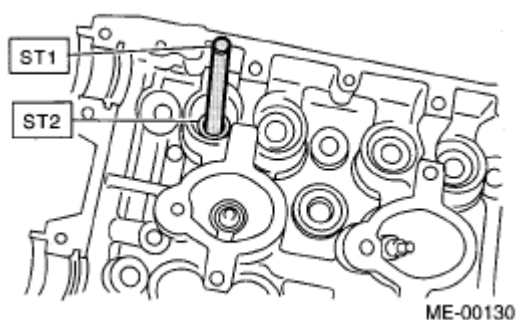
Identifying Valve Guide Remover ST1 499767200 And Valve Guide Adjuster ST2 18251Aa020
